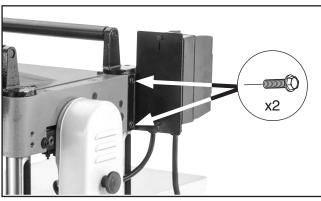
Magnetic switch installed (Models G0453W and G0454W).
